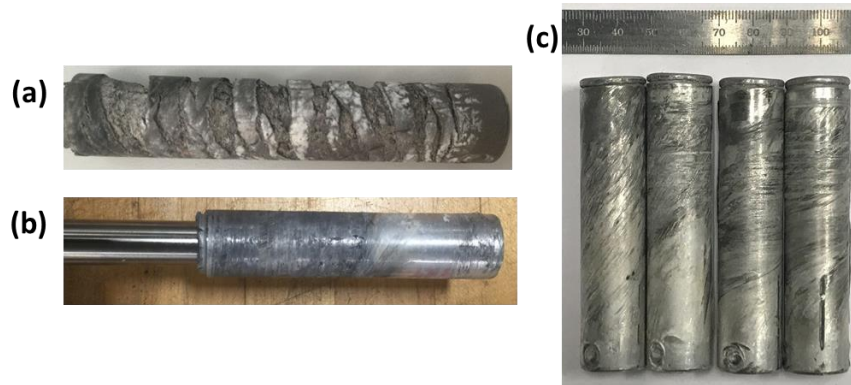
(a) Demonstration of melted tube due to excessive heat (b) tool stuck with tube because of low heat input and (c) AA6063 tubes
